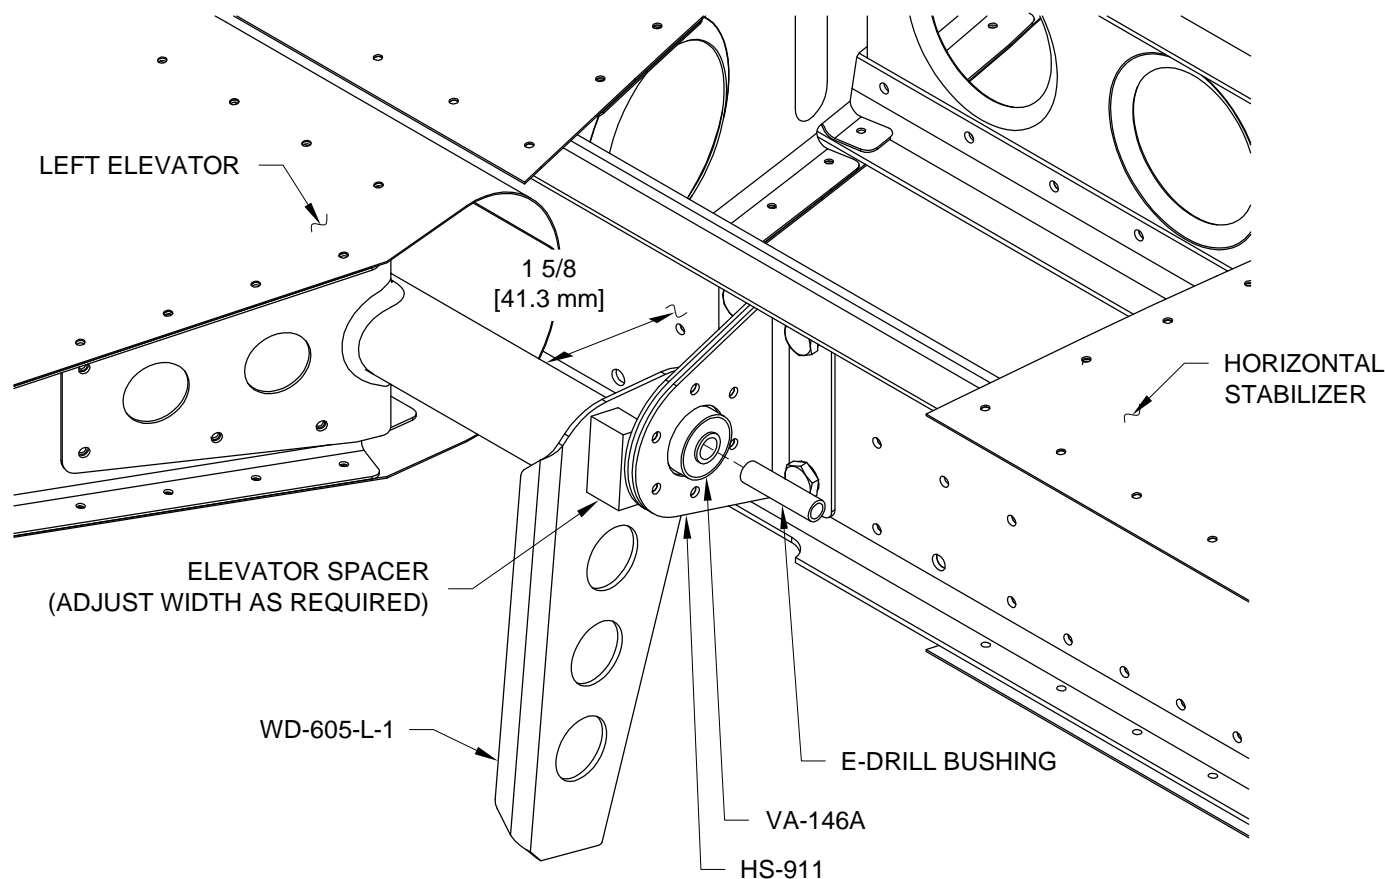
MATCH-DRILL ELEVATOR HORN
